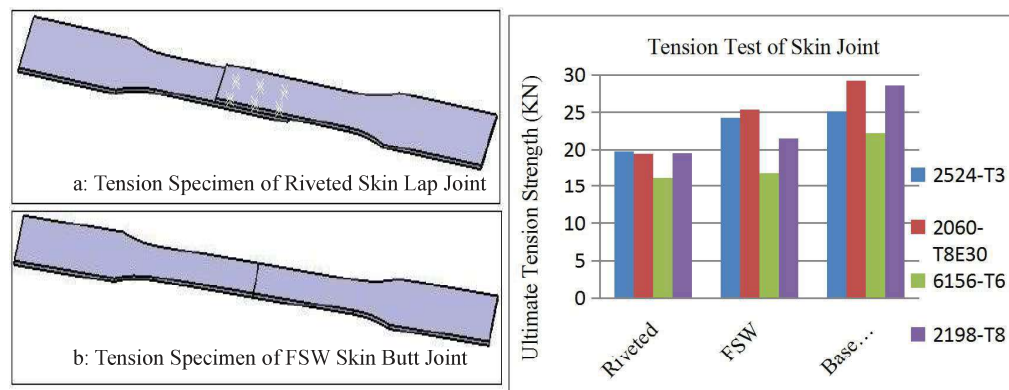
Tension Test results of Riveted/Welded Skin Joint
